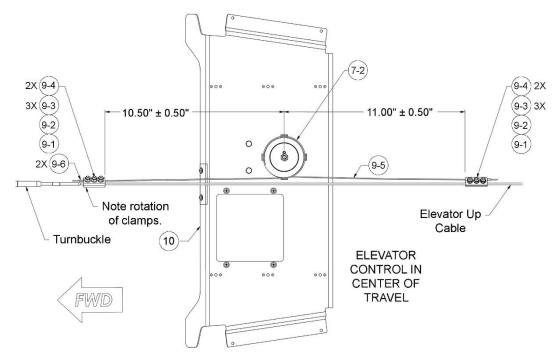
Connecting Pitch Servo Bridle Cable to Elevator Up Cable
